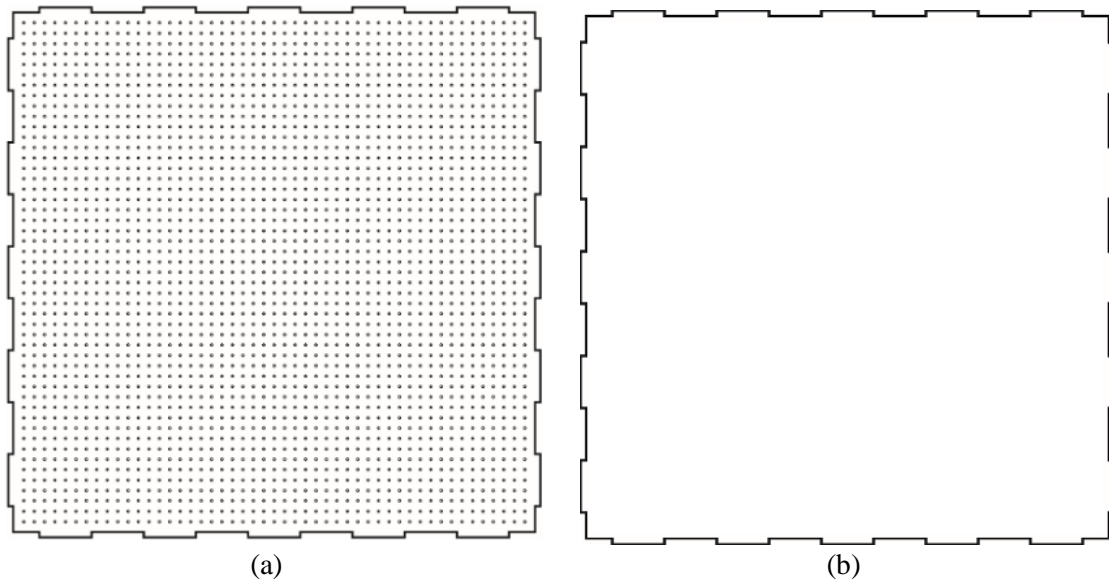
(a) Top view of the design (b) Bottom view of the design
